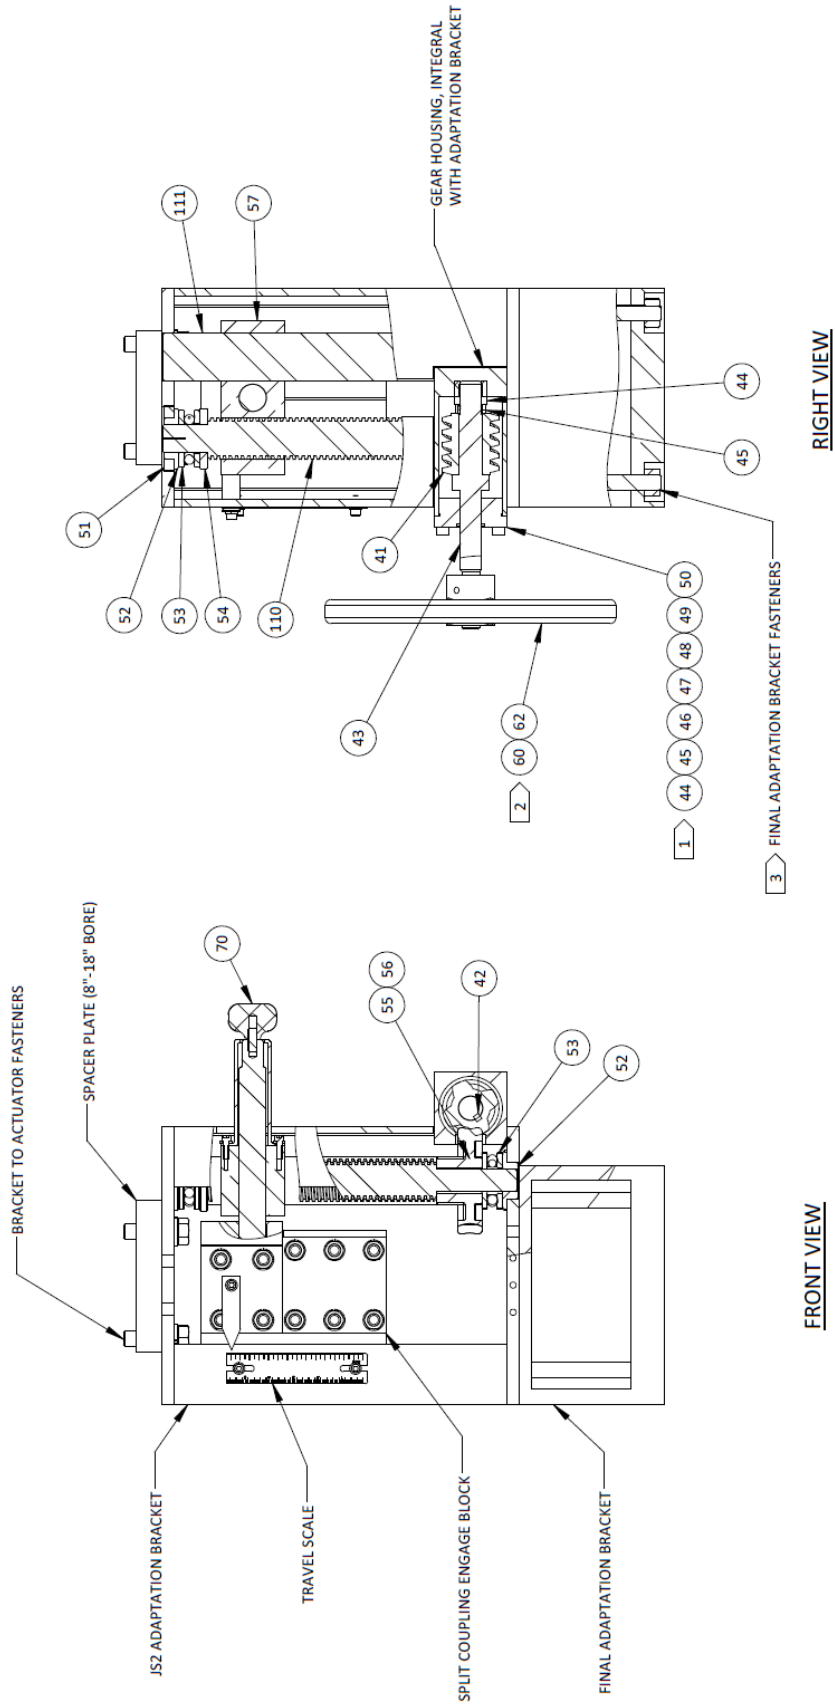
, Typical JS2 Assembly, stiffened assembly (adapted from Drawing 29224)
